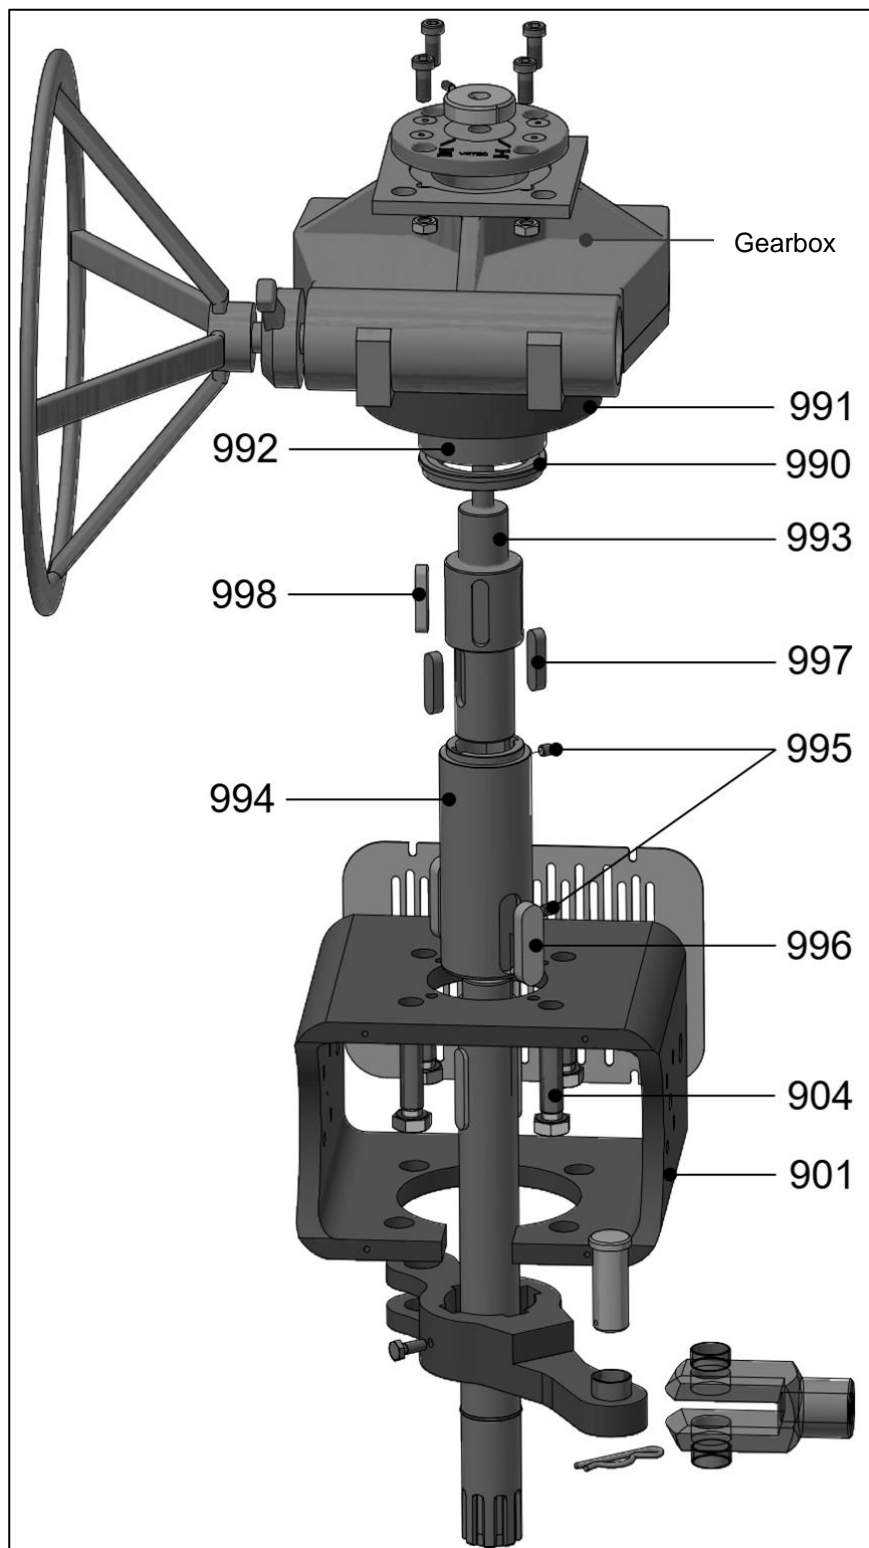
Assembly drawing: Mounting kit R-actuator with handwheel
